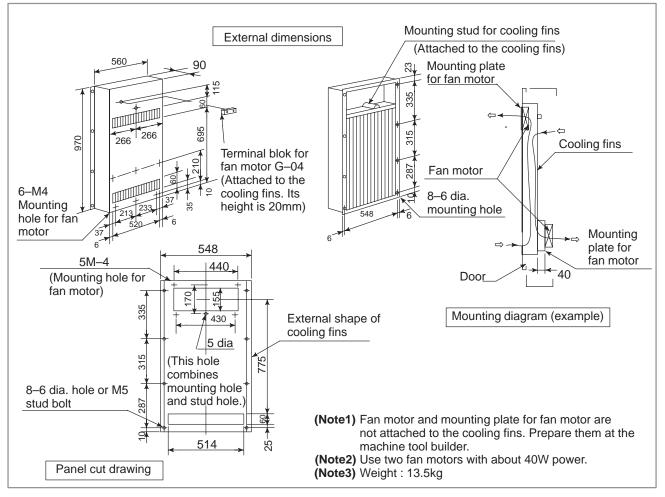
(d) External dimension and mounting method of cooling fin C (A02B-0053-K305)
